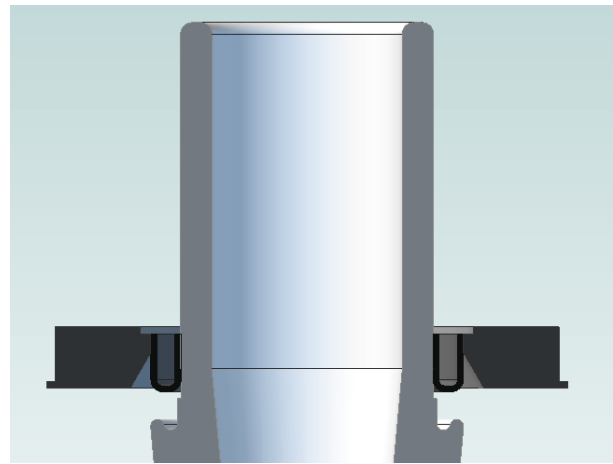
Braze joint between the extended inverted ceramic and the mounting flange by the “U” seal.
